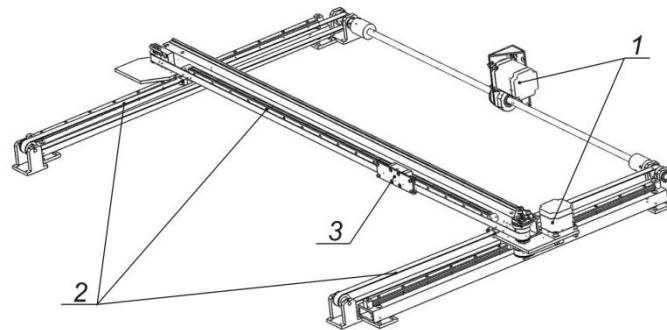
General view of the moving system (1 – drives; 2 – rails; 3 – carriage for fixation of the feeder)
